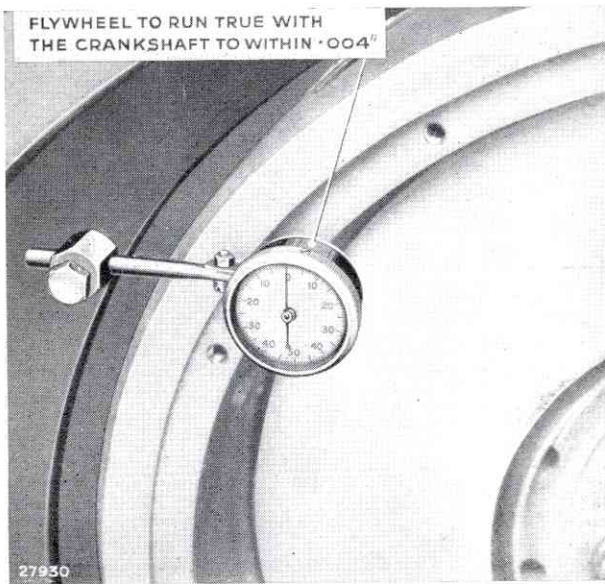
CHECKING FLYWHEEL FOR RUNNING TRUE
